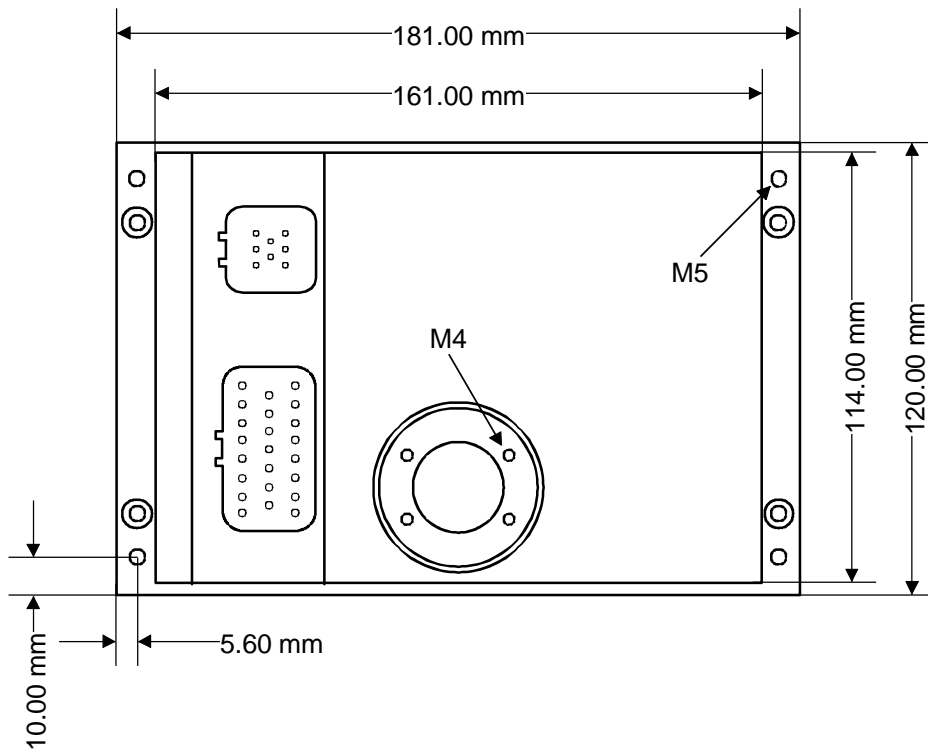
Display dimensions and mounting measurements. There are four M5 screw holes in corners for panel mounting.
